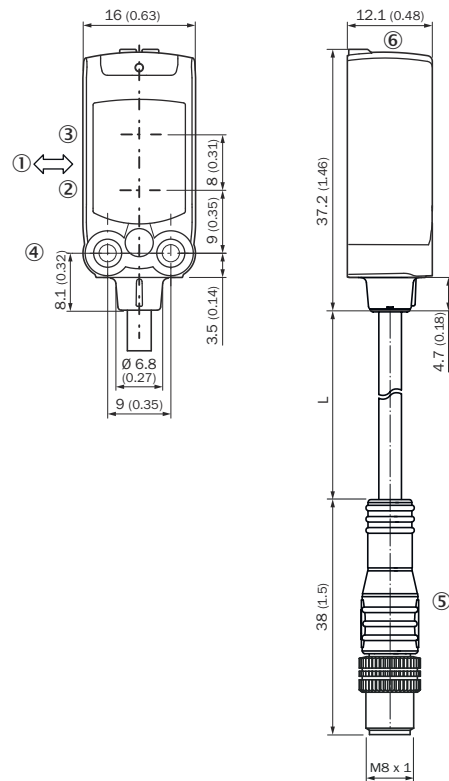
Dimensional drawing, cable with M8 male connector, knurled screws
